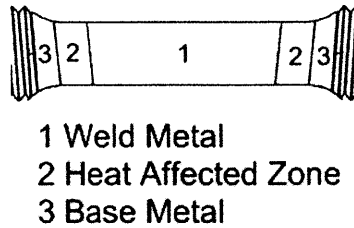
Tensile specimen orientation within the weld sample. [12]
